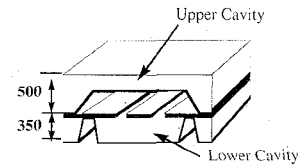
Dimensions for the completely shielded micropackaged circuit in microns.
